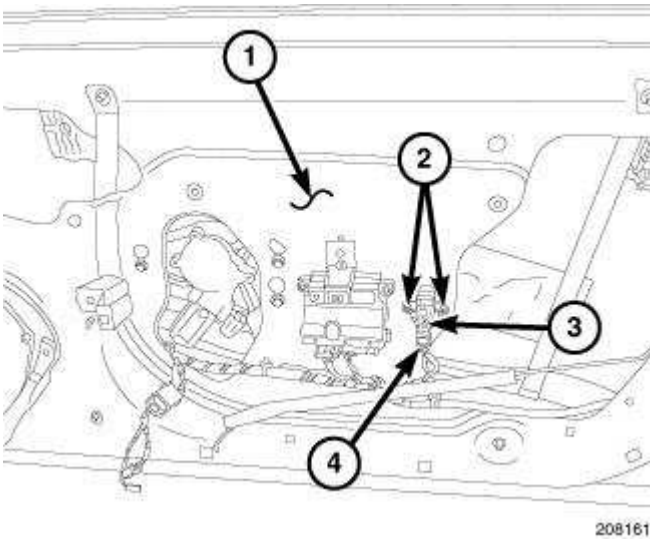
Identifying Door, Retaining Screws, Side Impact Sensor & Electrical Connector
